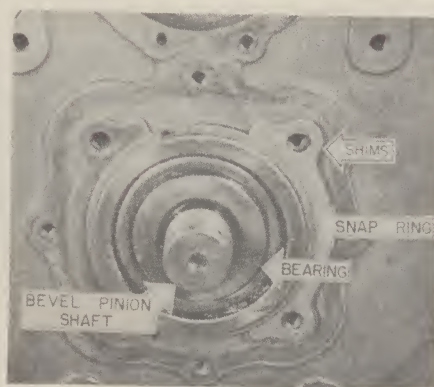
Half shims are used behind the bevel pinion shaft front bearing snap ring in the Super 99 four speed transmission. Shims control mesh position of pinion.
